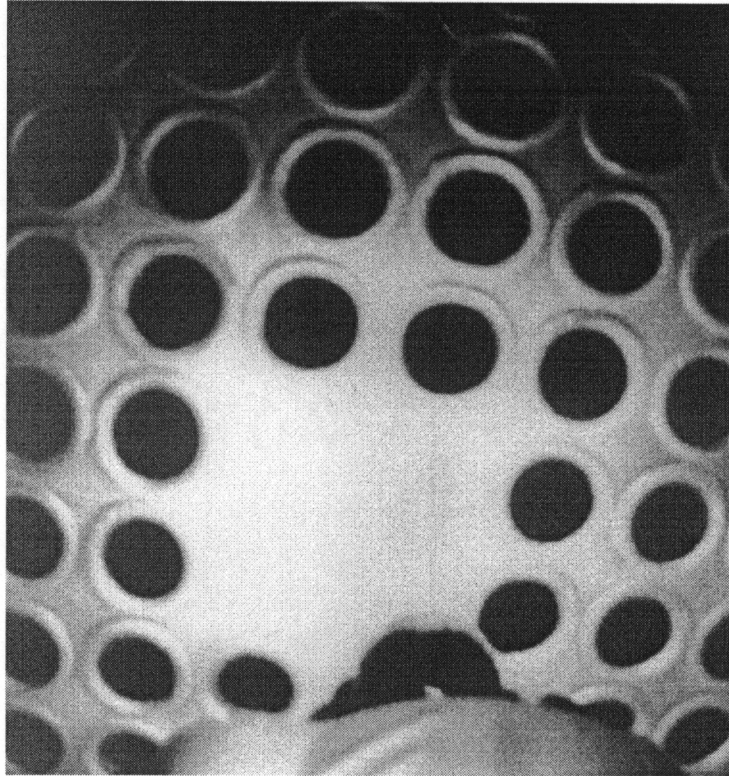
Square-Pitch, Flush-Welded Tubesheet
